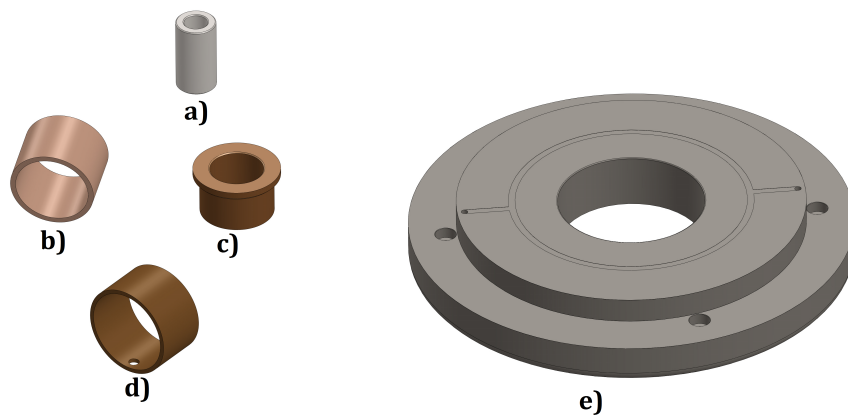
Journal bearings (left) and thrust bearing (right) of the expander prototype
